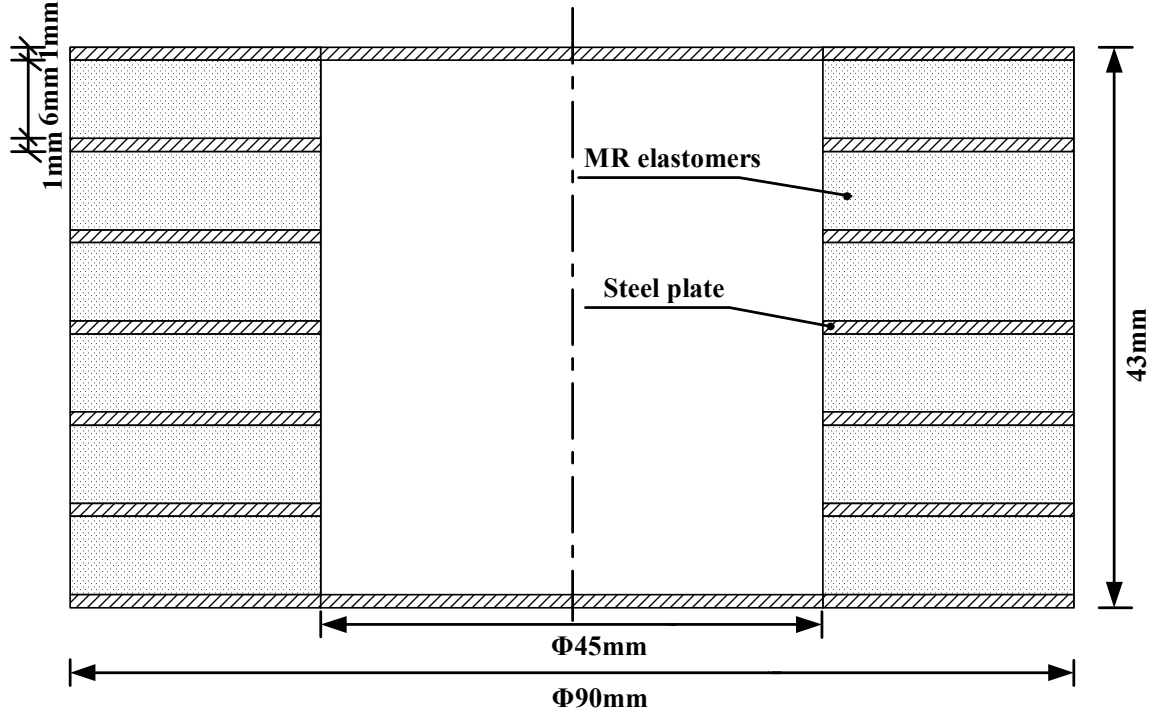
Schematic cross-section of the MR elastomers bearing
